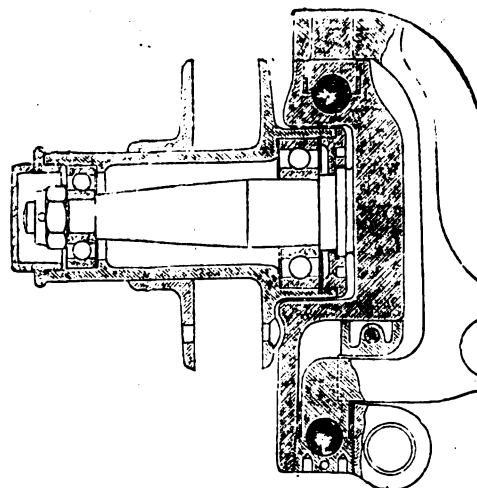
Sectional View of Front Wheel Hubs and Steering Pivots on Beaufort Cars.
